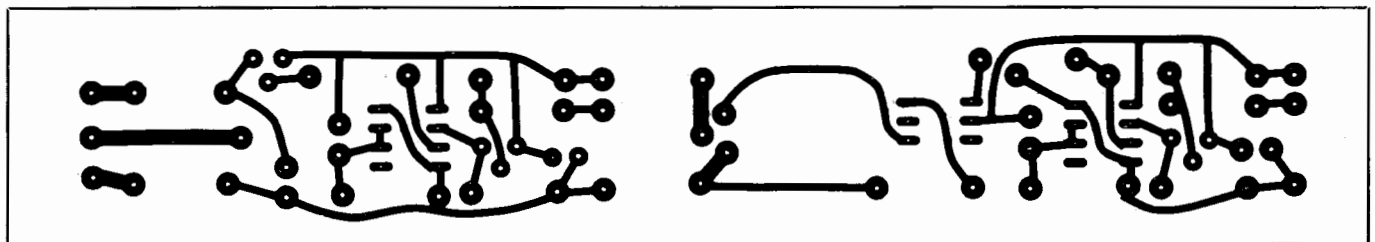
Actual-size etching-and-drilling guides for fabricating pc boards for Fig. 10 (left) and Fig. 11 (right) circuits.
